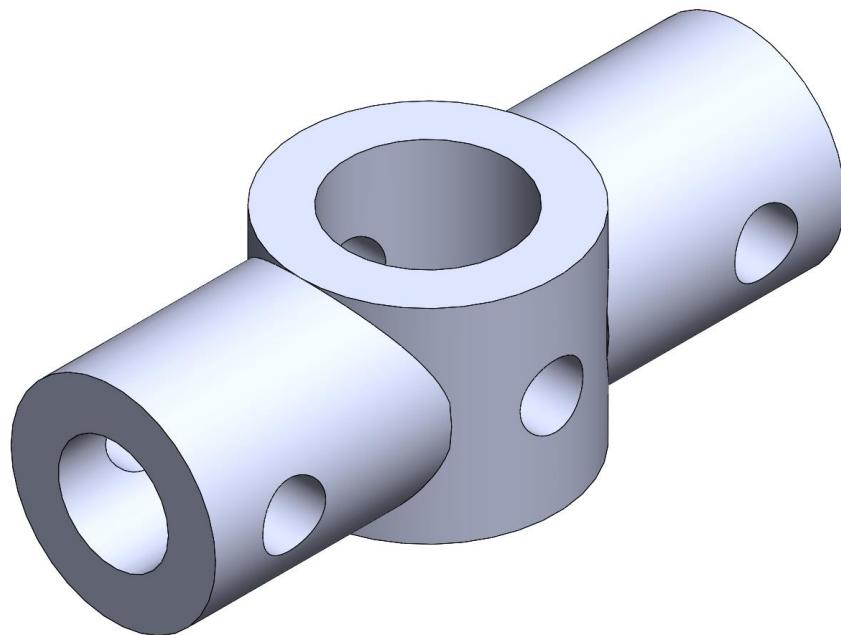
Attachment for paddles, where various paddle solutions can be tested.
